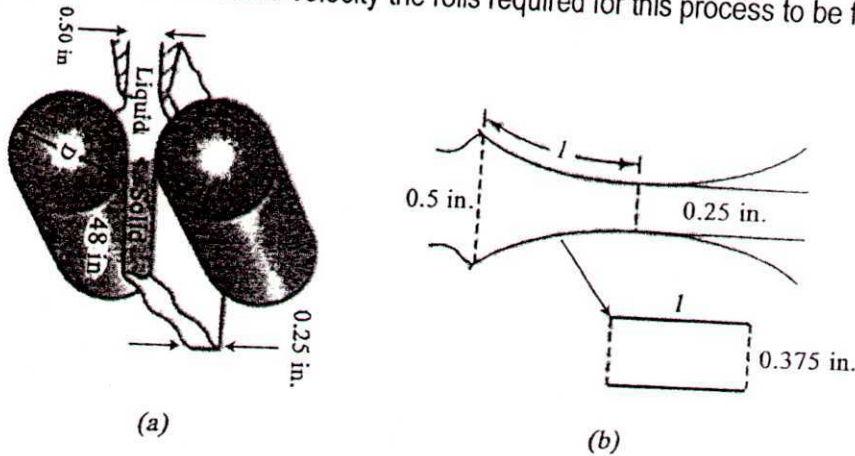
Strip casting of plate: (a) schematic of the process using two counter rotating rolls and (b) element of liquid metal in touch with rolls.
